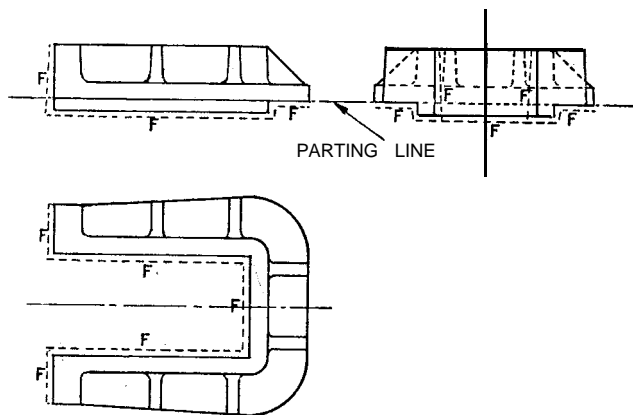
Locomotive hornblock pattern. with allowance for machining
